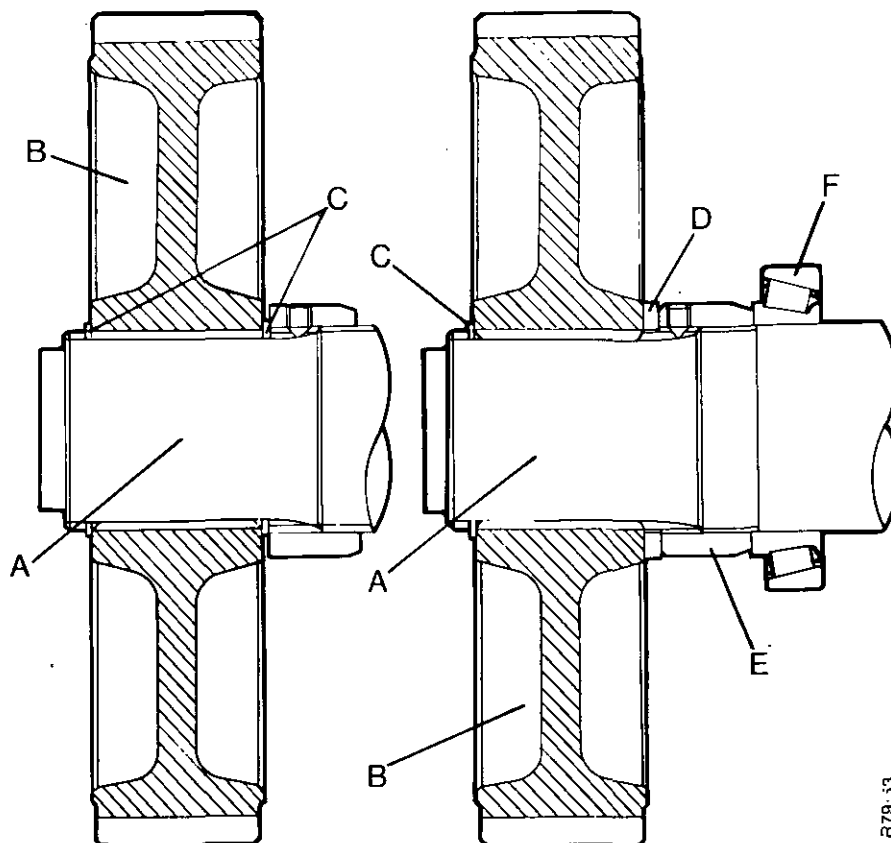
FINAL DRIVE SHAFT AND GEAR
